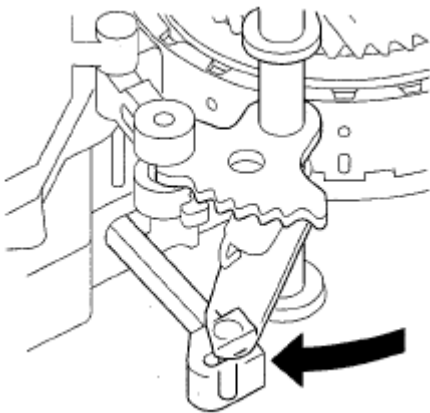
Aligning Control Lever Pin With Manual Valve Guide
